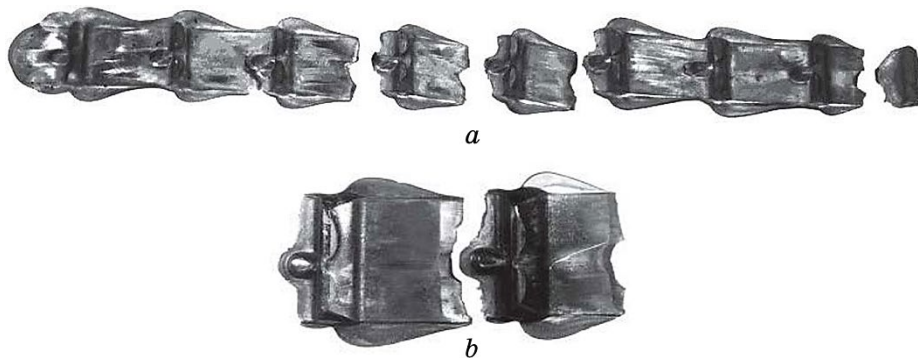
Strip rupture during die rolling with effective (plentiful) lubrication of blades workpieces of 4 stage of AI20 engine compressor made of 14X17H2SH steel: strip (*a*), part (*b*).
